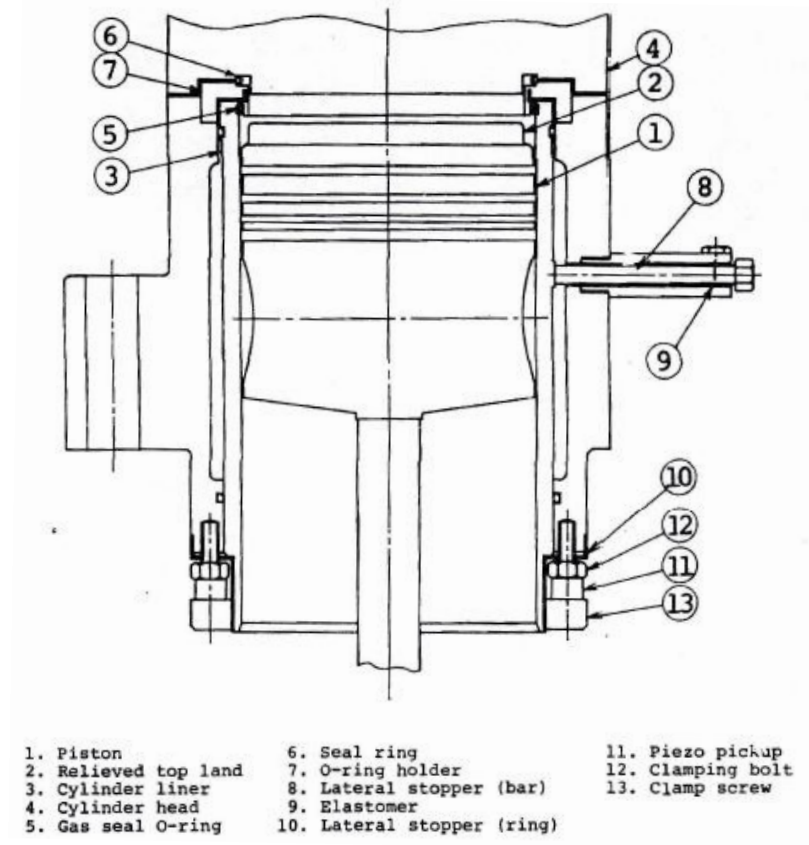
Schematic of floating bore piston/ring/liner assembly friction measurement device [23]
